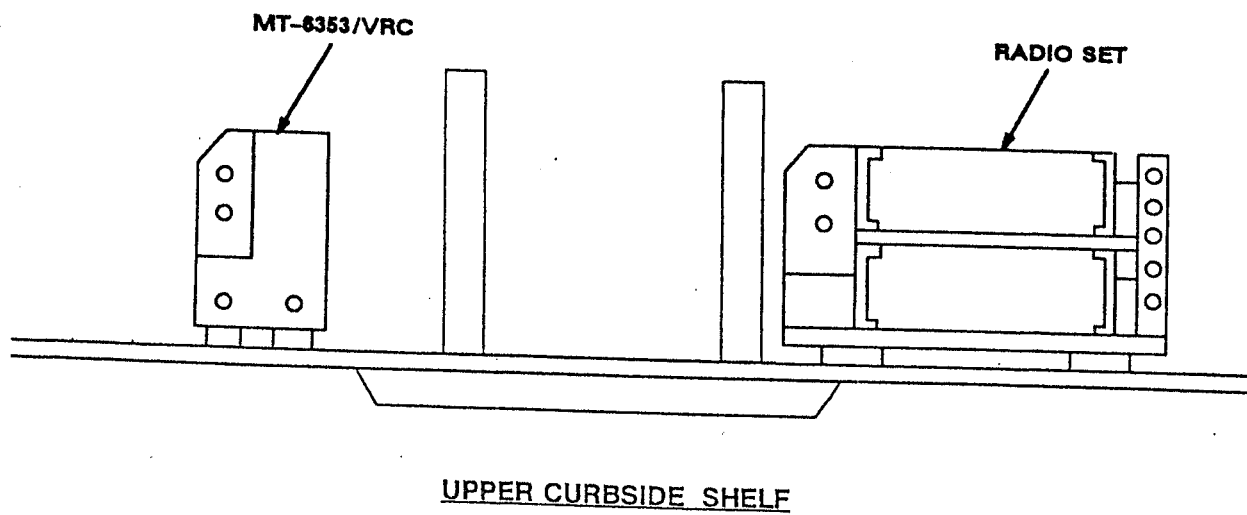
(2). MK and Radio Installation: Radio Equipment Location
